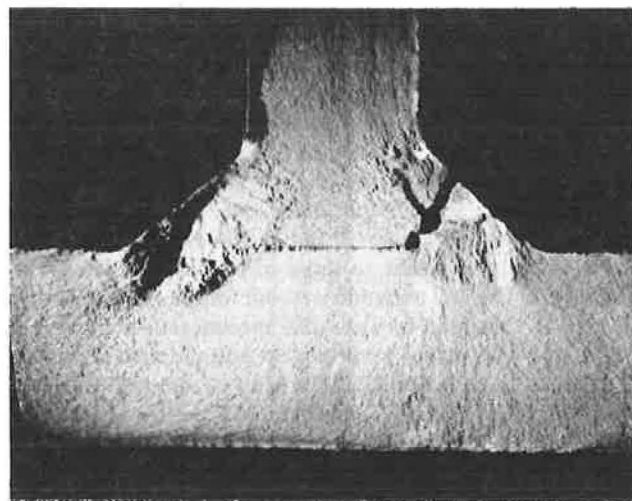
A gas pocket in the longitudinal fillet weld of a welded beam.
